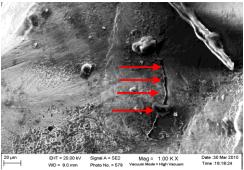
Fractured surface under SEM; arrows indicate the fold
